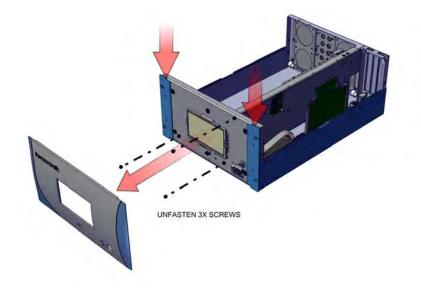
Unfasten Hardware Front for Measurement Side Removal
